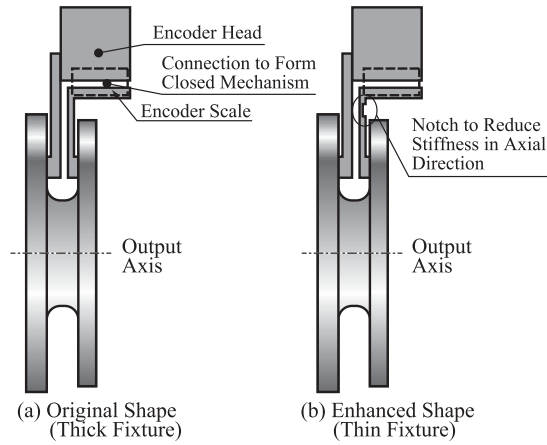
Mechanical Structure of Fixtures to Realize Different Fixture Thickness
